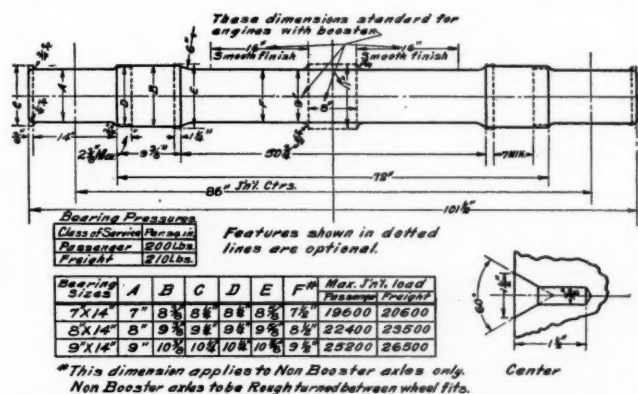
Sizes and dimensions of recommended trailer truck axles of the two-wheel type
